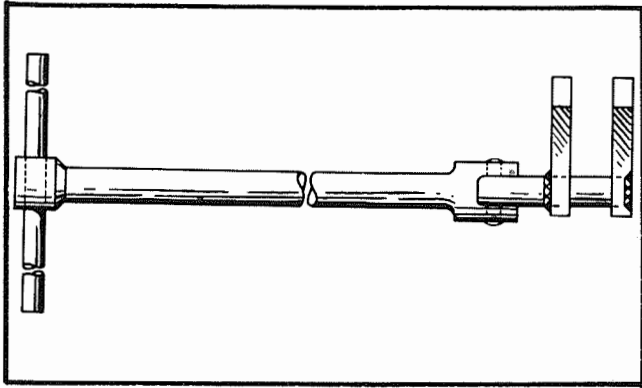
Cylinder Intake and Exhaust Air Deflector Installing Tool
